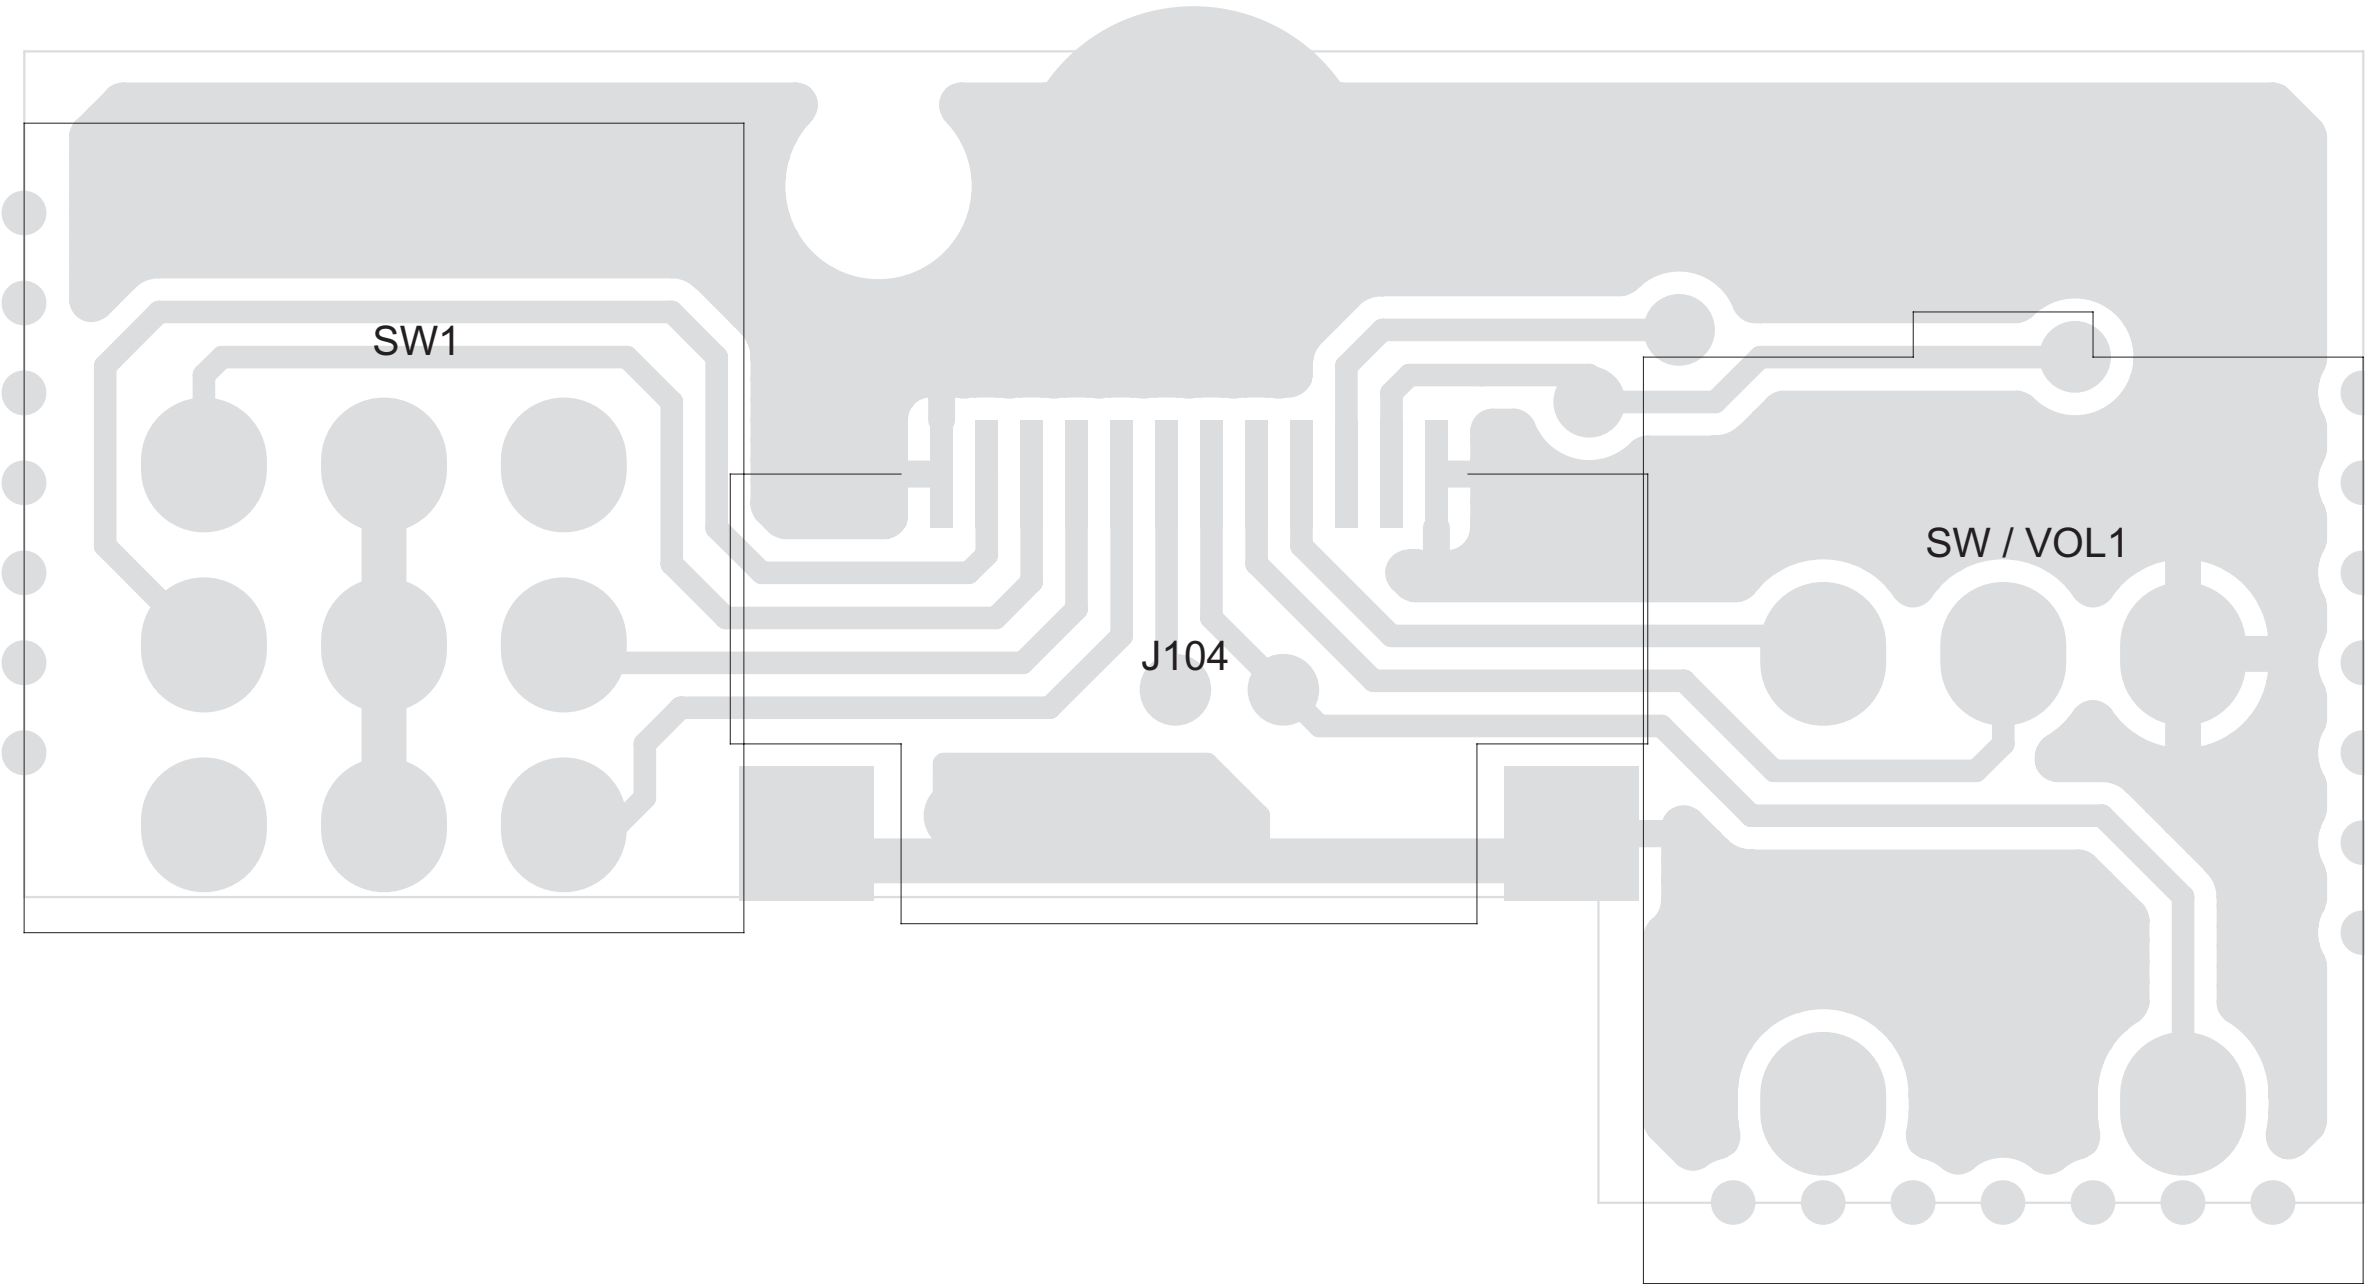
UHF1 (403–447 MHz) Sub Circuit Board Bottom View: PCB No. E11-000002-02
